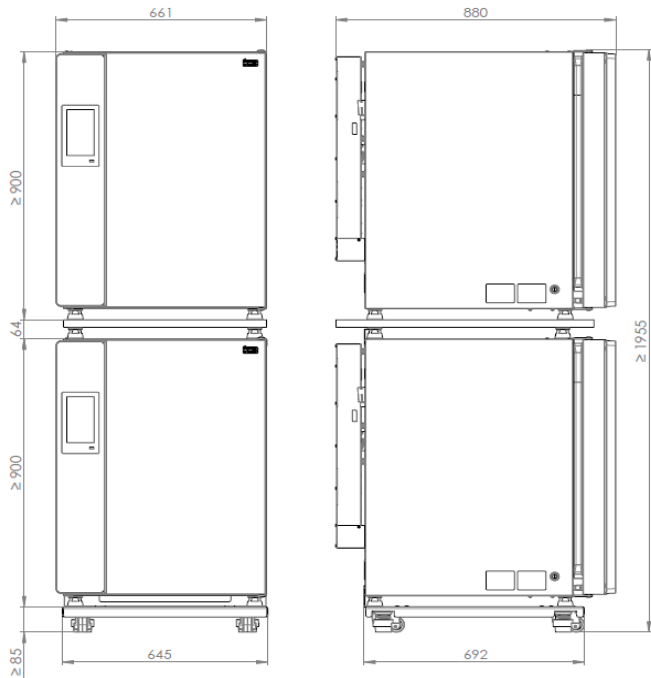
Vios iDx CO₂ Incubator in stacked configuration. Bottom incubator on 85 mm stand with casters, stacking adapter kit on top with second incubator resting on stacking platform. Front view (left) and side view (right) with dimensions.
